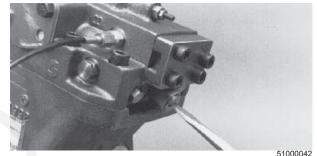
Adjusting Charge Pressure Relief Valve
